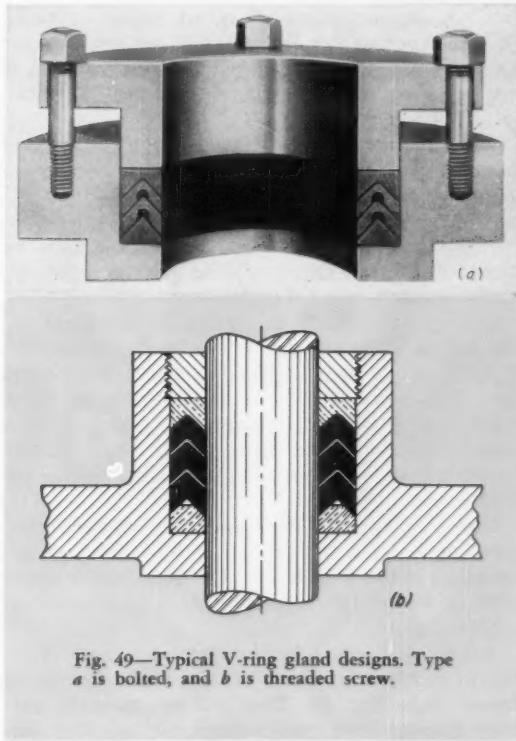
Typical V-ring gland designs. Type *a* is bolted, and *b* is threaded screw.
